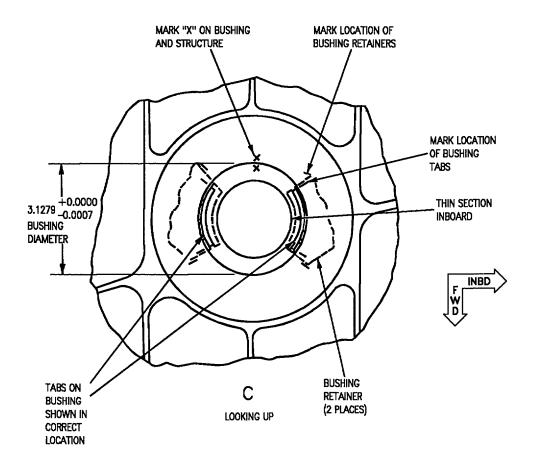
Inboard Pylon Upper Bushing Alignment (Sheet 2)
